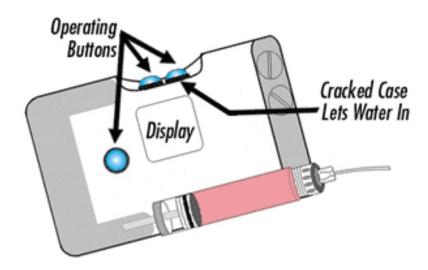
Image showing the cracks between the operating buttons which allow water inside [23]
